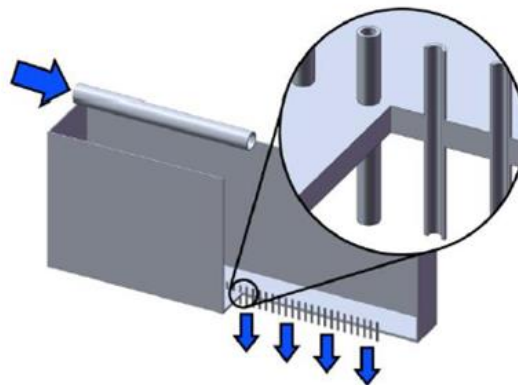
"Concentric: Holes, Half Tube" part of John G. Bustamante's (2014) Box-type distributor designs
